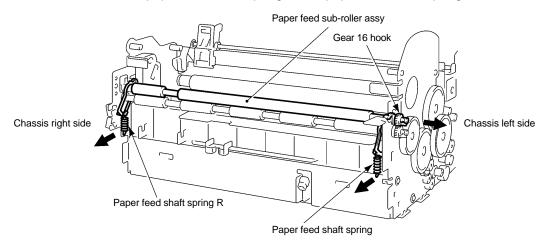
Removing the Paper Feed Sub-roller Assy
